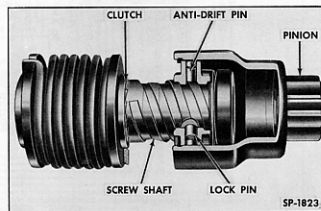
Bendix "Folo-Thru" Starter Drive Unit
